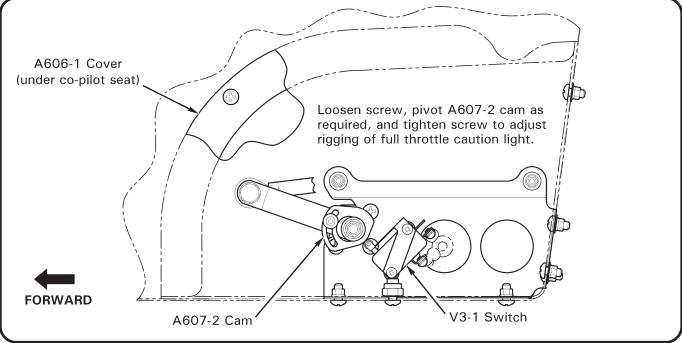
FULL THROTTLE CAUTION LIGHT RIGGING CHECK
